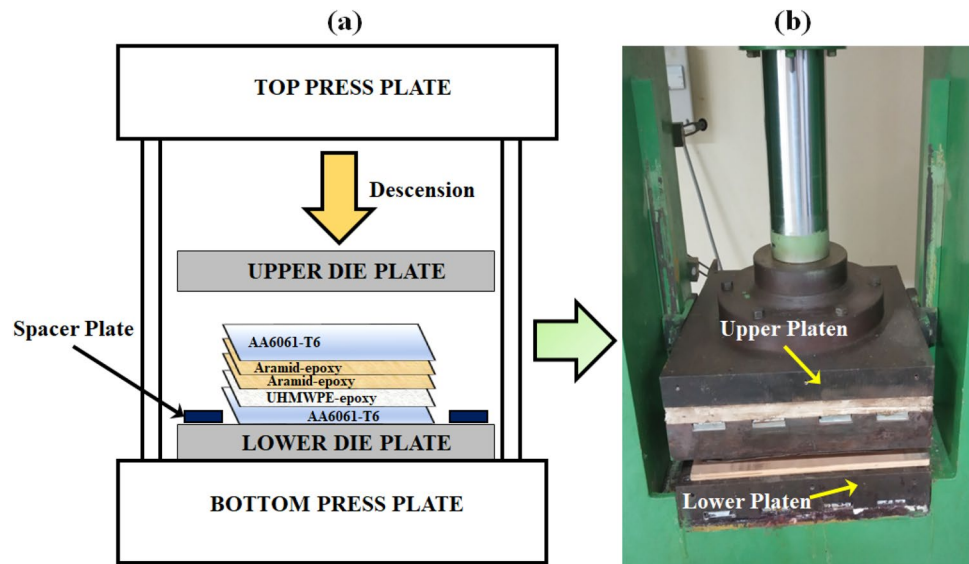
(a) Fabrication setup schematic (ex: SSP-I sequence). (b) Compression moulding machine.
